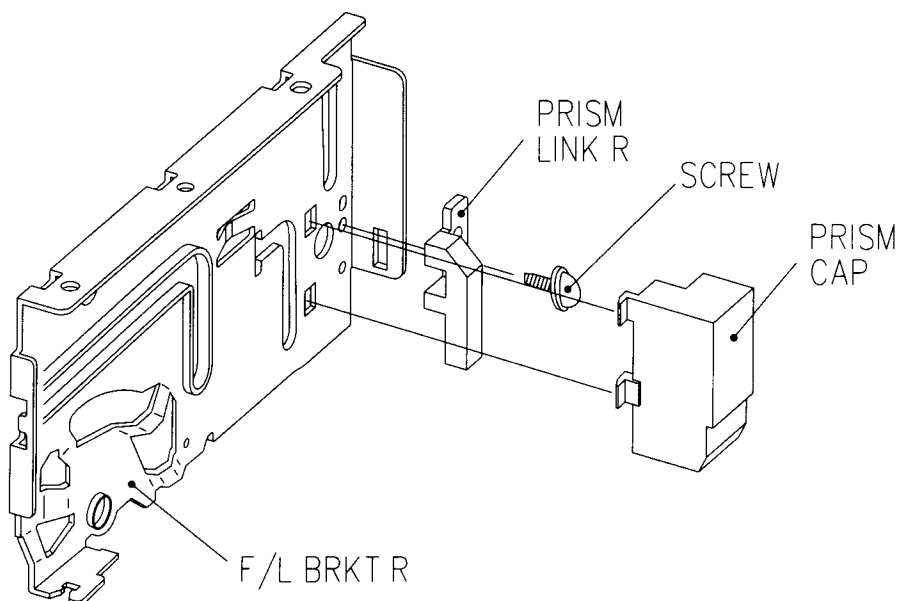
DISASSEMBLY OF THE F/L BRKT R
